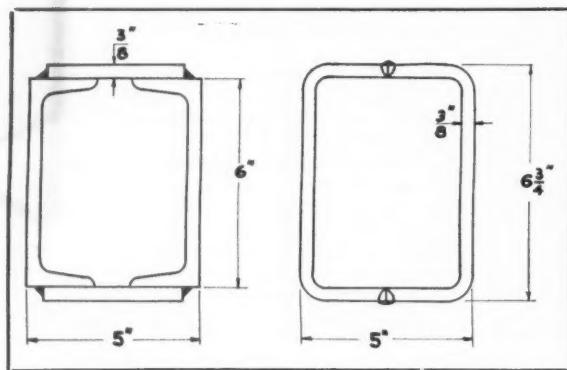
(Left) Old design of box section weldment produced by joining two structural channels to two flat plates by hand arc welding. (Right) New design of box sectional weldment produced by shearing standard steel plate to proper length and width, forming on a press brake, and welding in one pass (each side) with a submerged arc welder.
